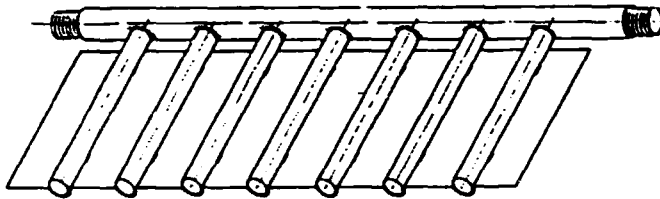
Crevice corrosion at welded points between the risers and the absorber plate.
